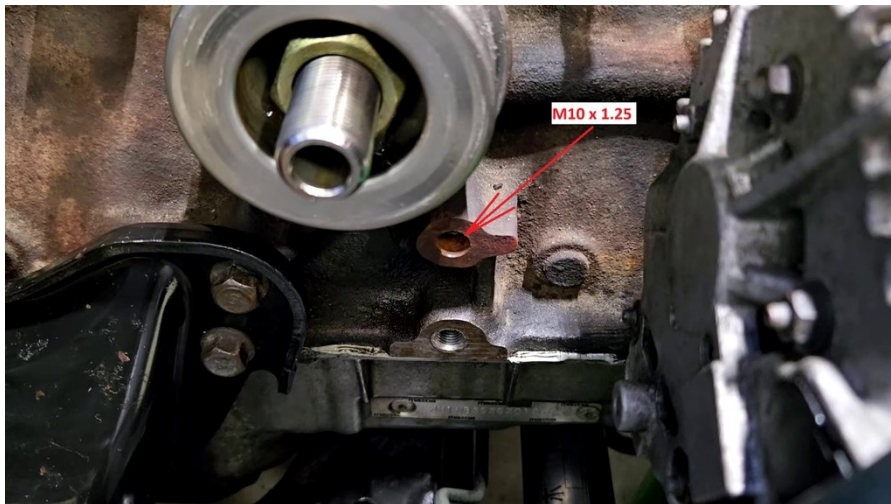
Unused M10 x 1.25 upper block thread for the underbrace lower bracket.
